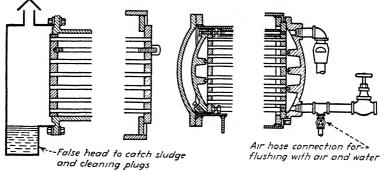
Convenient arrangements for cleaning intercoolers (Courtesy of Power)
